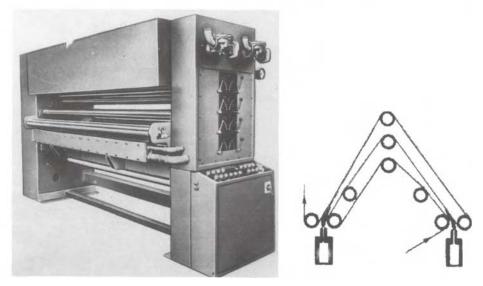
Two burner gas singeing machine (Courtesy of Ernest Turner (Parex) Ltd.).
